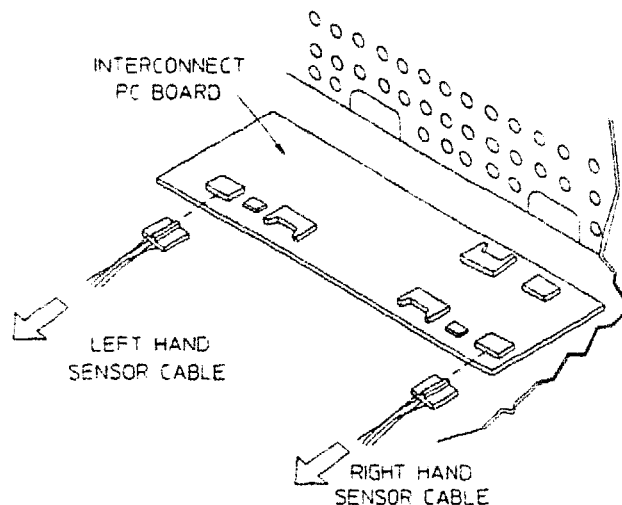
Removing the Sensor Cables from the Interconnect PCA
